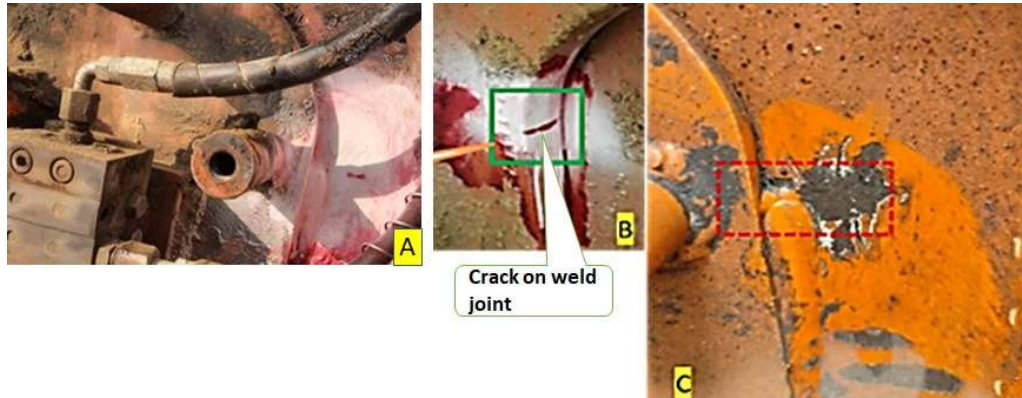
A: Initial crack observation on the welded fillet joint. B: Confirmation of crack by dye penetrant testing. C: Visual inspection of crack location after the cleaning of the joint.
